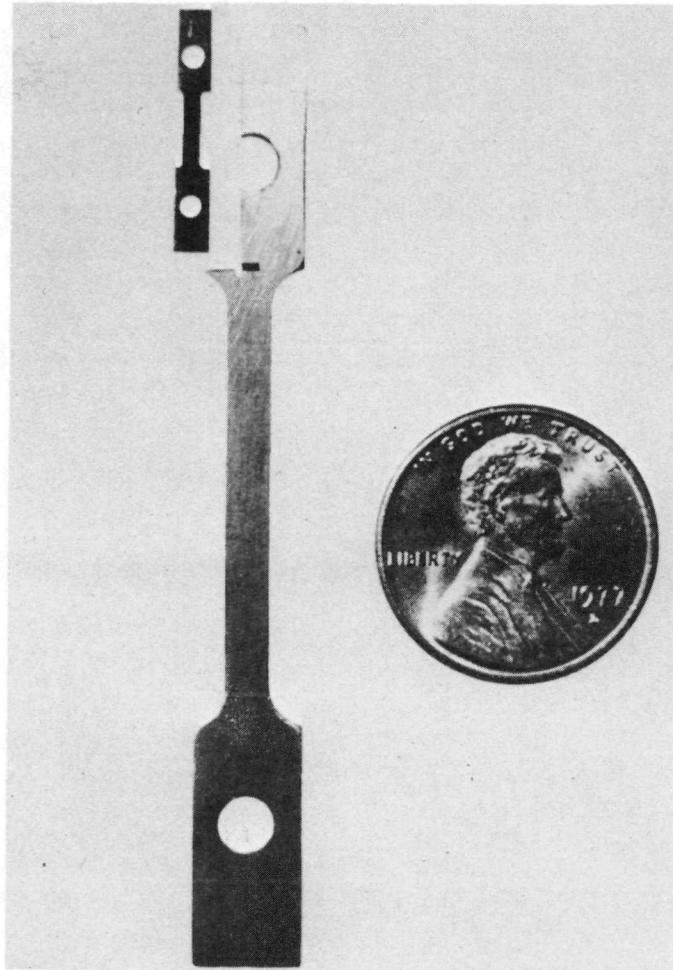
Miniature Uniaxial Tensile Specimen Compared with the Standard Uniaxial Specimen from which it is Machined
